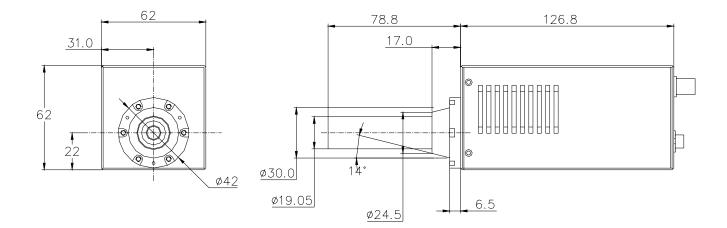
Vortex[®]*-EX SMCD package external dimensions (in mm).
